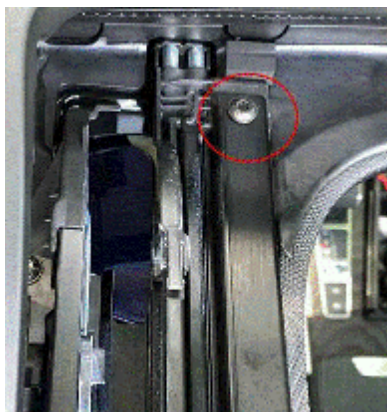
Loosen the bolt a few turns but do not remove the screw completely.
